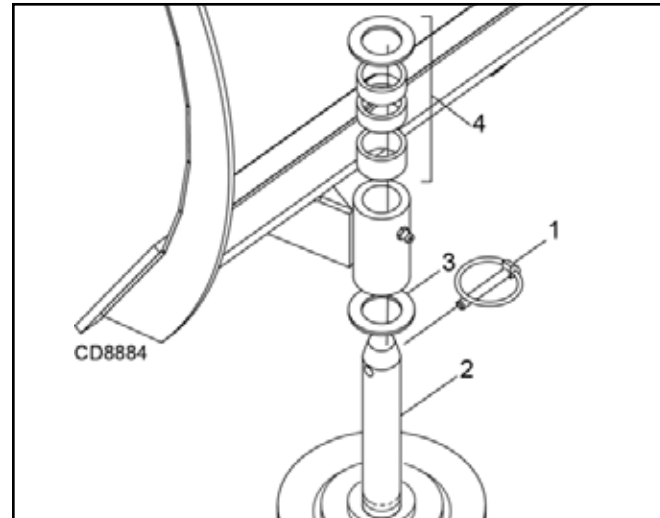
Loader Front Blade Skid Shoe Height Adjustment
